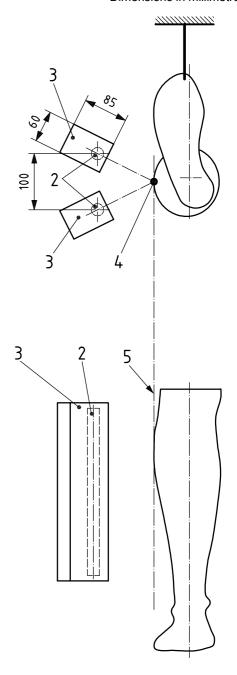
Test sample dimensions trans-tibial (below-knee) — Socket former
